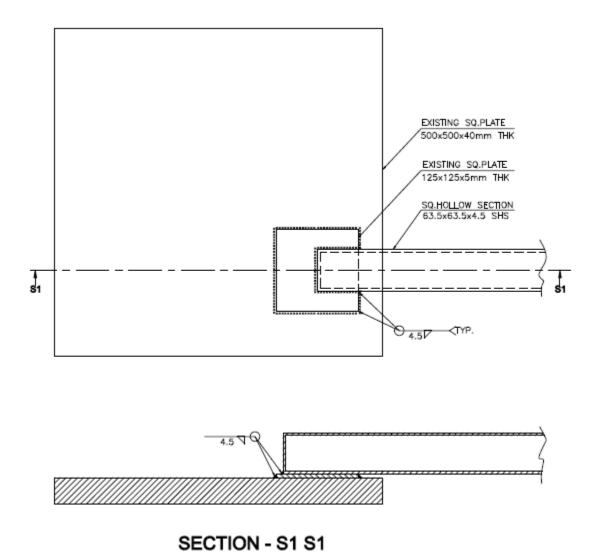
b Welding details for square hollow section on overlapping surface
